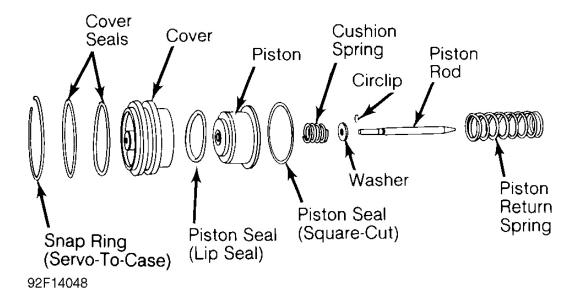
Exploded View of Band Apply Servo Courtesy of FORD MOTOR CO.
